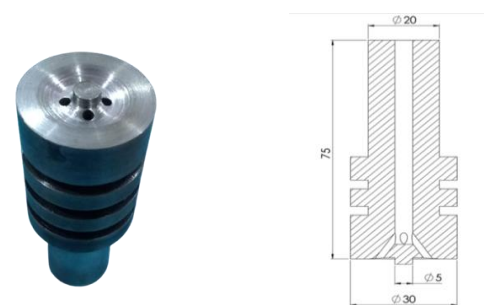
Hollow Tool for DFSP (Dimensions shown are in mm)
